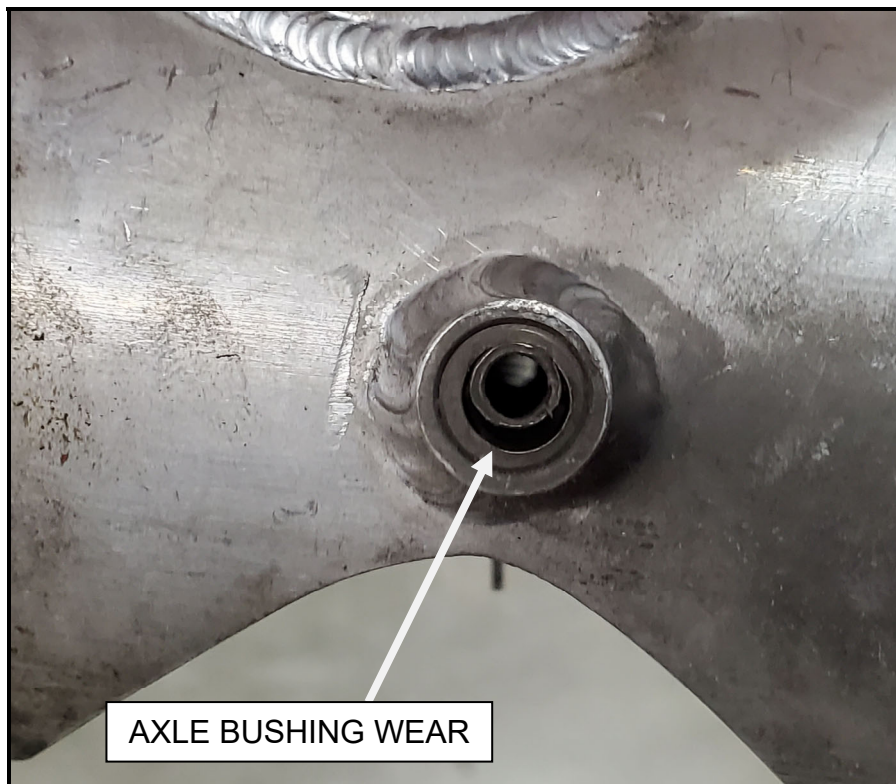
Butterfly Valve Axle Bushing Wear Example
